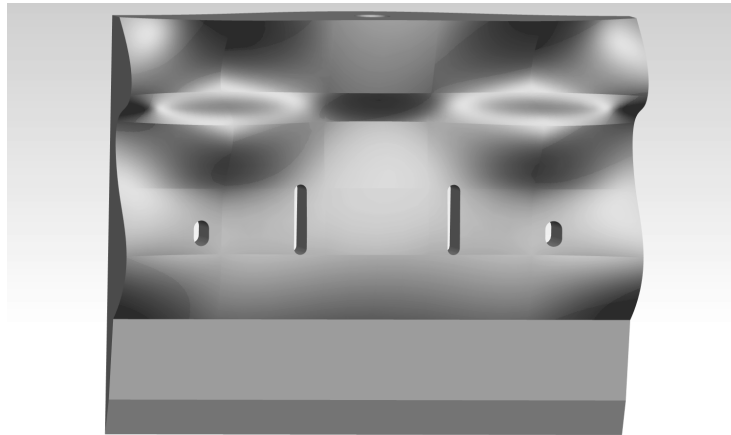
Front view of the final geometry for the longitudinal ultrasonic vibration assisted cutting knife.
